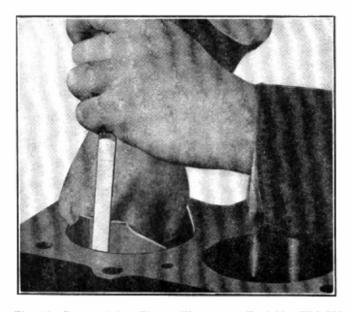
Determining Piston Clearance-Tool No. HM-593
